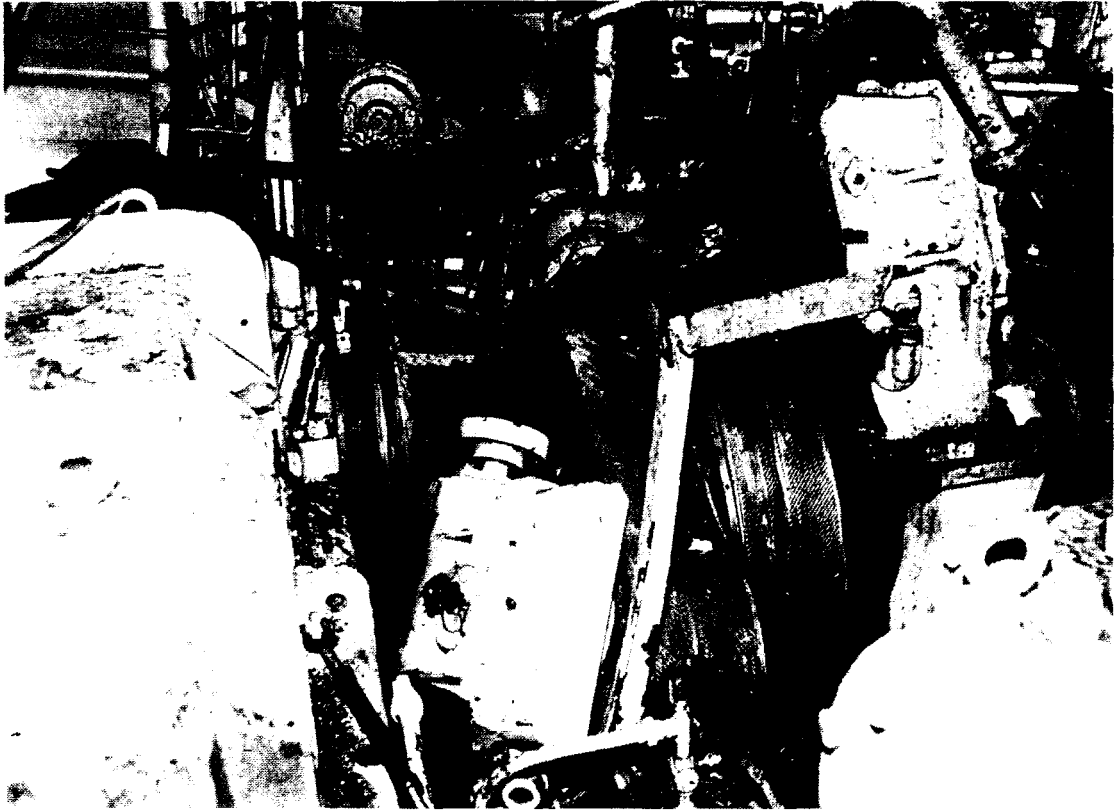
'SEATRAN NEW YORK' GEARBOX
